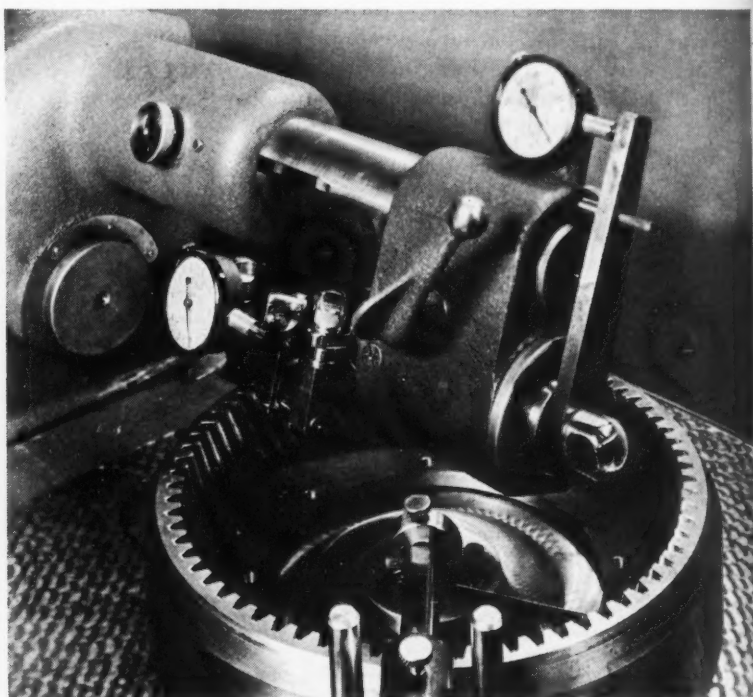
Close-up View of Checking Head of Machine Shown in Fig. 1 Set up for Checking Gear
